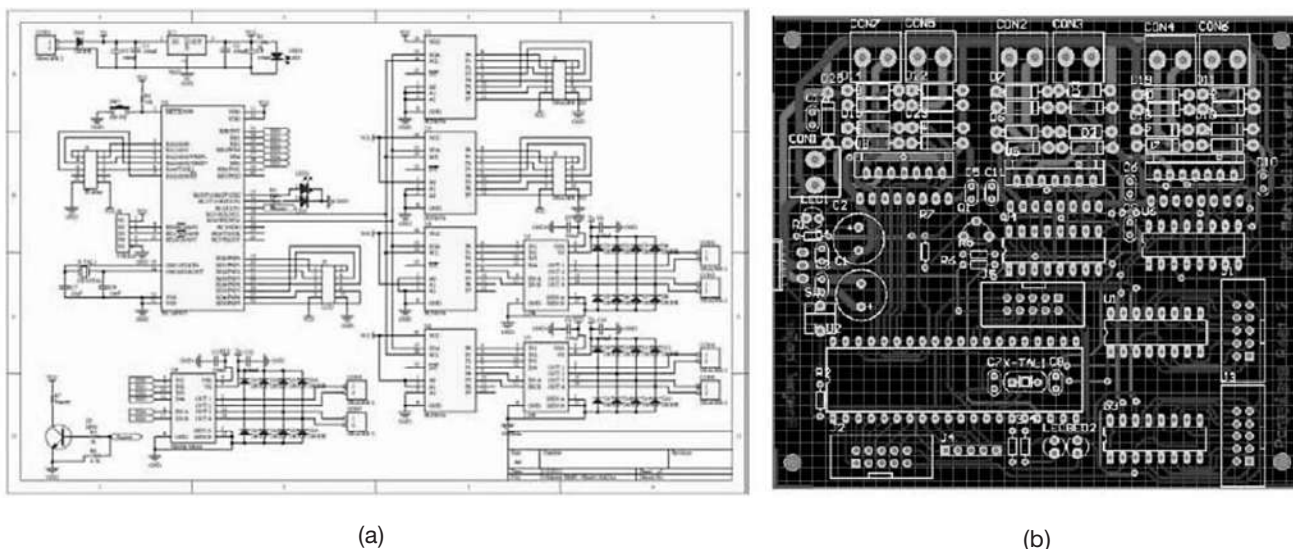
(a) Control board schematic (b) Control board PCB (printed circuit board)
